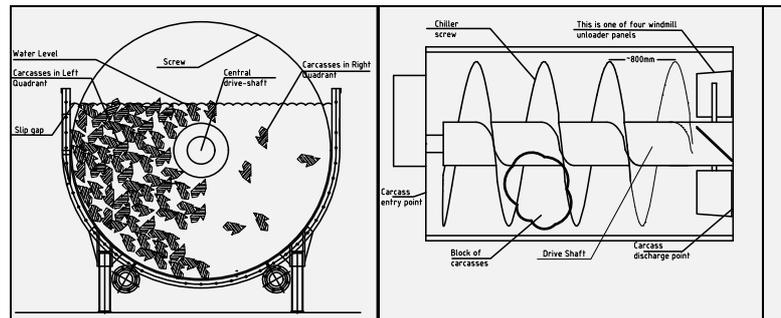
Left picture shows the cross section of a screw chiller viewed from the discharge end. Right picture shows a 3000mm screw chiller viewed from the top. Note the different parts of the chiller and the zone which designates a block of carcasses.
